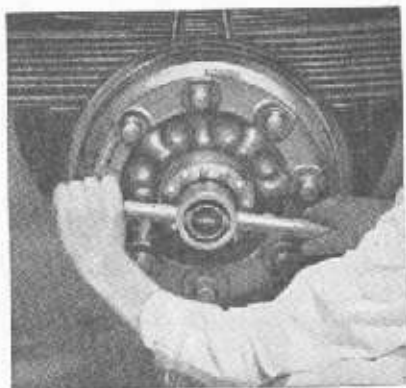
Rear hub bearing adjustment, using the special "Britool" wrench.
